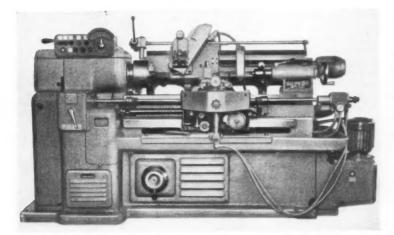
Mannaioni Man-au-cycle high-speed threading lathe equipped for taper threading and copy turning
